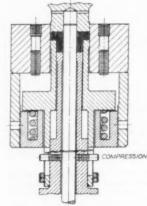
DIE ASSEMBLY WITH SECONDARY PUNCH, ANVIL NUT, AND SPRING
